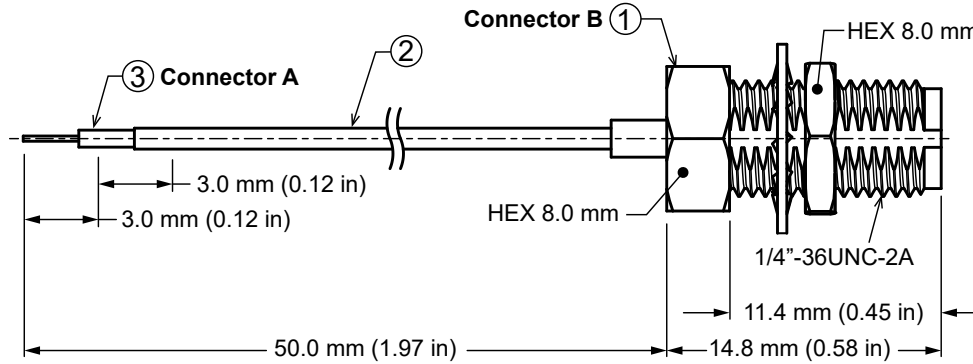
Product Dimensions for the CSS-SGAF-050-STTN Cable Assembly
